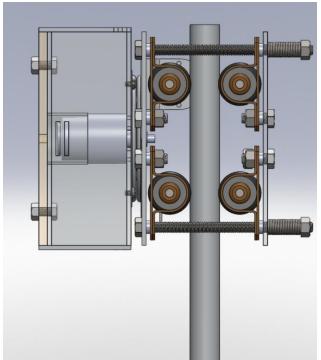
Assembly of Rotary Module, Translational Module, and Cane
